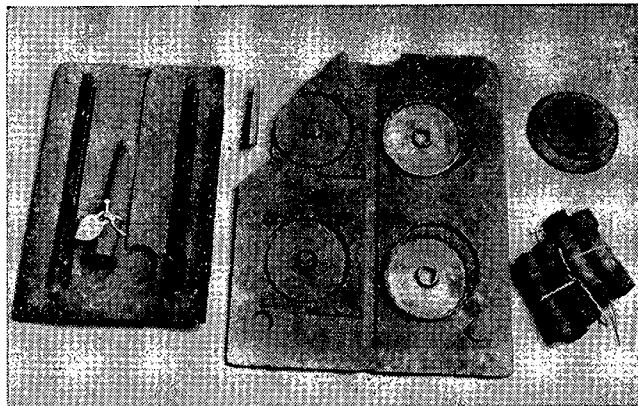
Tube mould at left and ratchet gear mould in centre were designed for liquid metal but were successfully used for the parts shown, made of ore. Oil seal at top right is ready for service immediately after drilling of bolt holes and painting. Tensile test bars at lower right were made in resin-bonded shell moulds.
